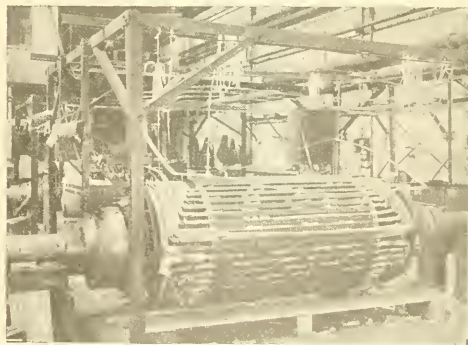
ROTOR IN THE PROCESS OF WINDING
